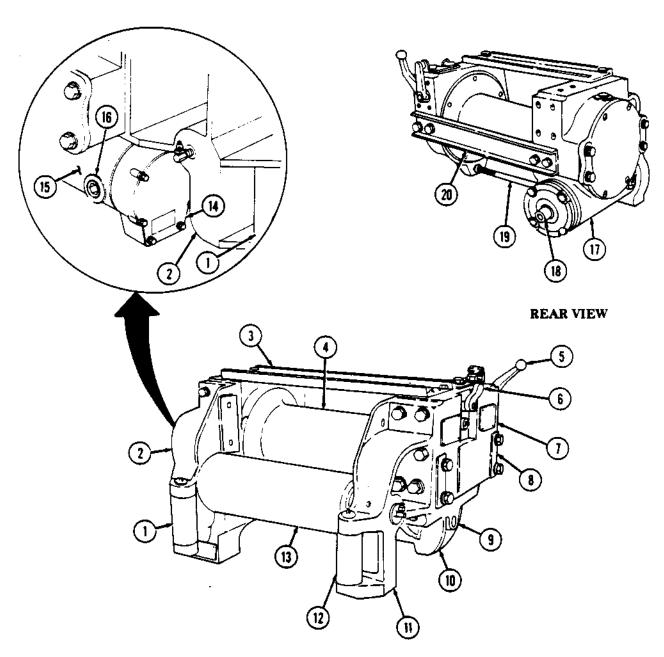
Front Winch Assembly With Level Wind and Cable Tensioner.
